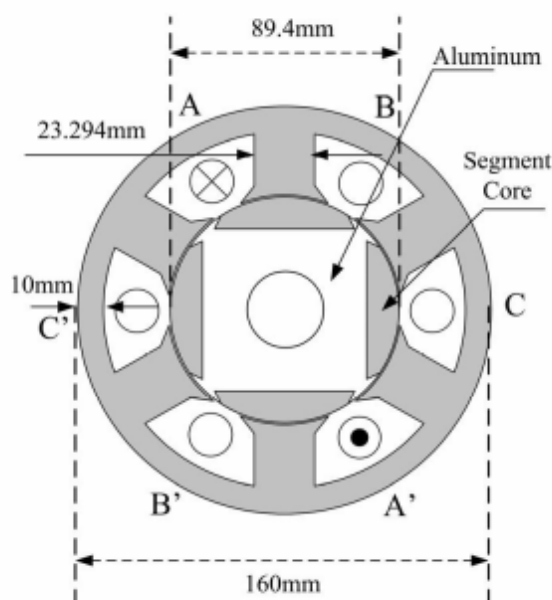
Segmental rotor SSRM placed in aluminium block [36]
